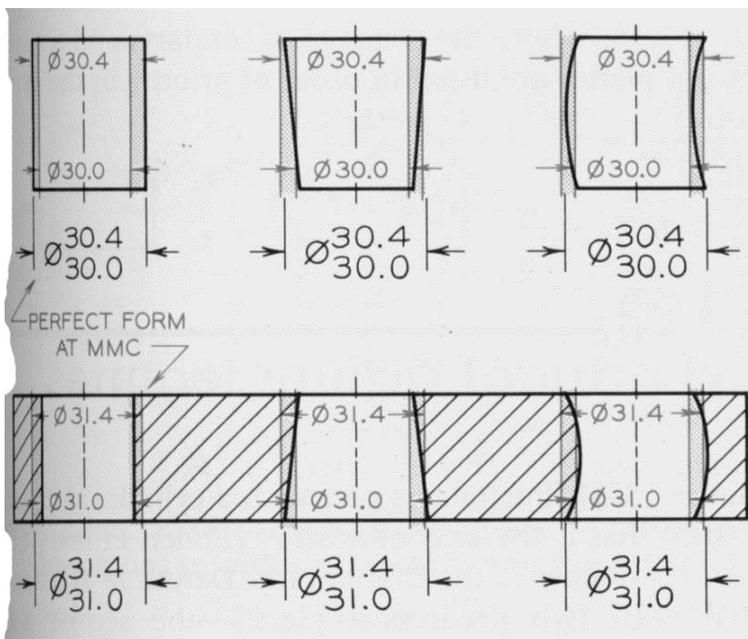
When only a tolerance of size is specified on a part, the limits prescribe the form of the part, as shown in these examples of shafts and holes with the same limits of tolerance.
